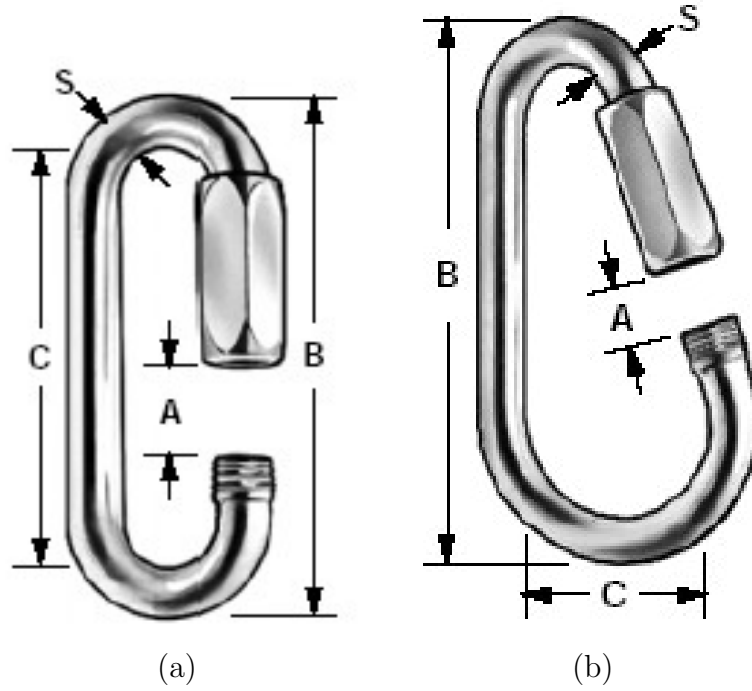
(a) Standard jaw threaded connector (b) Pear shaped threaded connector
